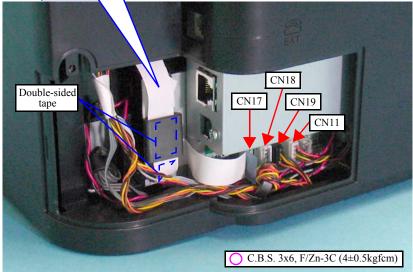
Removing the Scanner Unit/ADF Unit (1)
